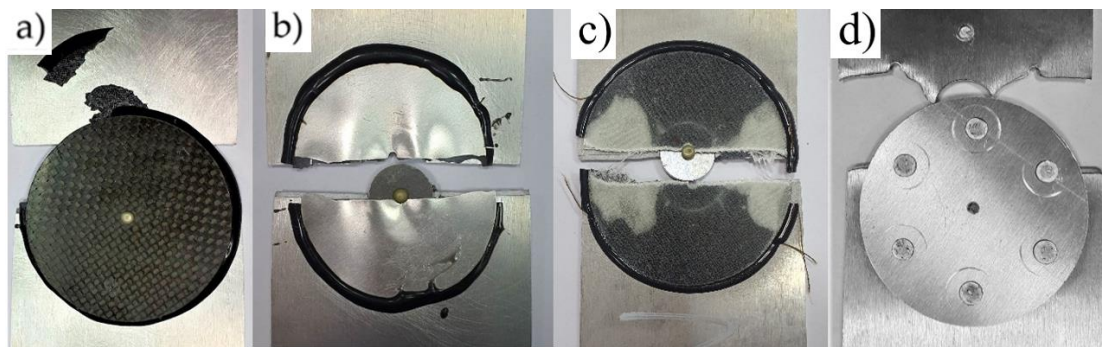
Photos of failure of tensile specimens with overlay: a) carbon, b) metal thickness = 0.3 mm, c) glass, d) riveted metal thickness = 2 mm.
